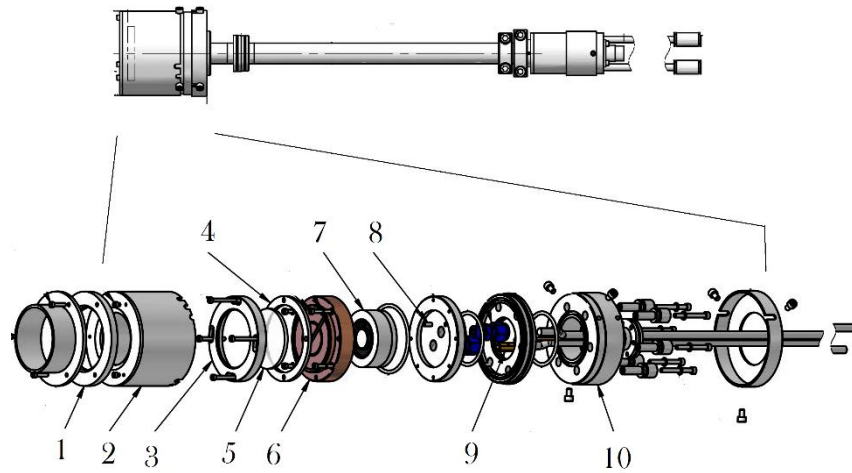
Representation of the sputter source and the principal elements, which compose the sputter head : 1) gas distribution ring, 2) space shield weldment, 3) and 4) target hold rings, 5) target, 6) copper cooling well, 7) magnet, 8) water inlet 9) high voltage wire, 10) cathode. Picture adapted from [114].
